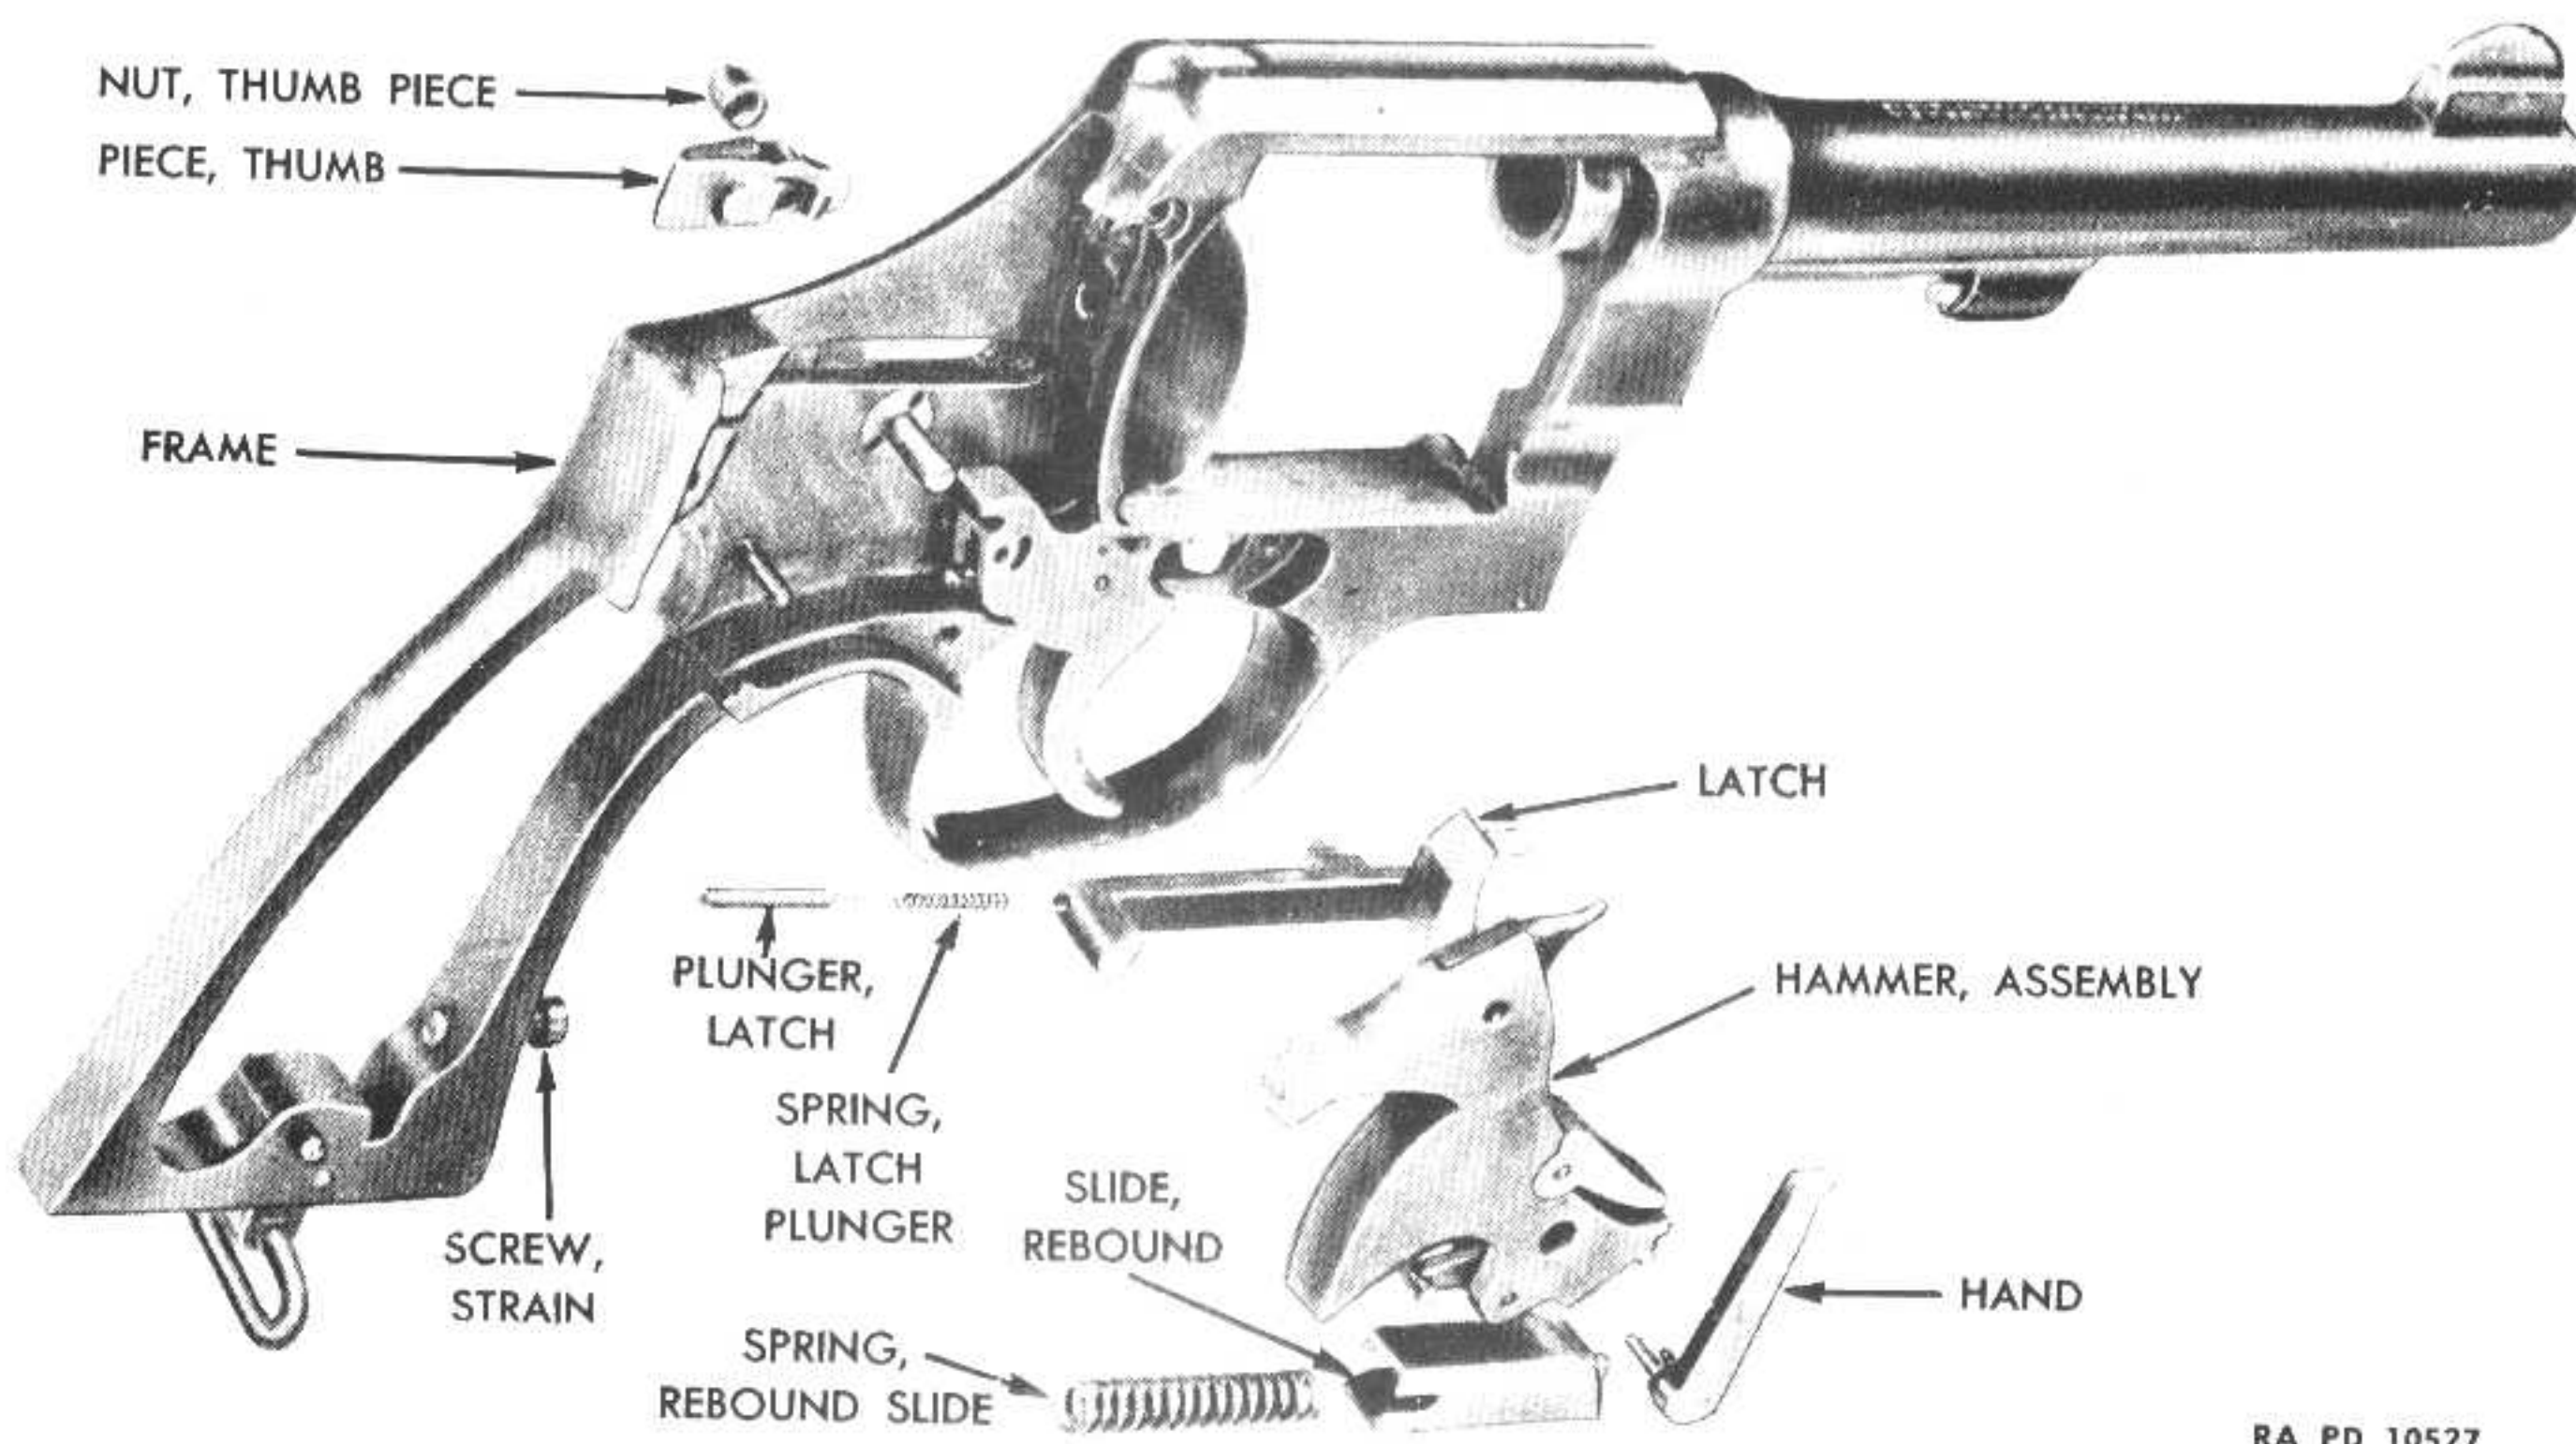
Smith and Wesson Revolver M1917 Showing Side Plate, Stocks, Mainspring and Swivel Removed — Exploded View
